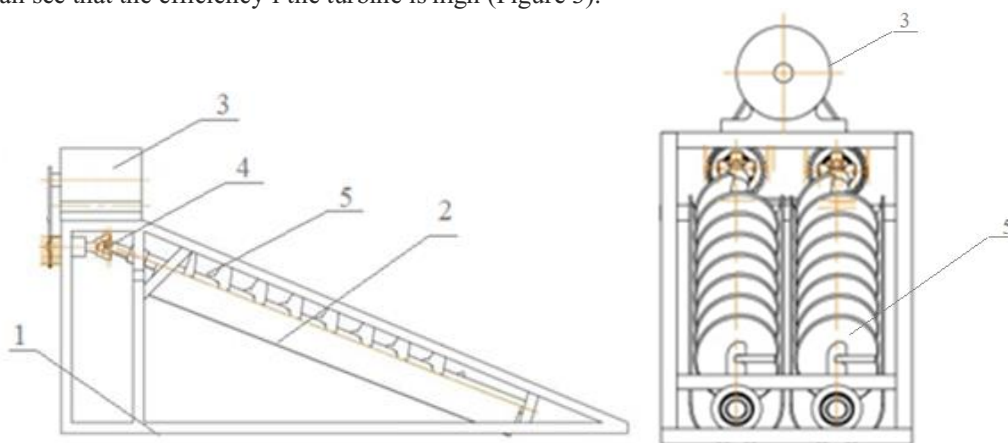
Microhydroelectric power plant with two parallel screw turbines: 1-device base, 2- turbine tray, 3 - generator, 4 - turbine and pulley connecting part adjusting shaft, 5 - screw
